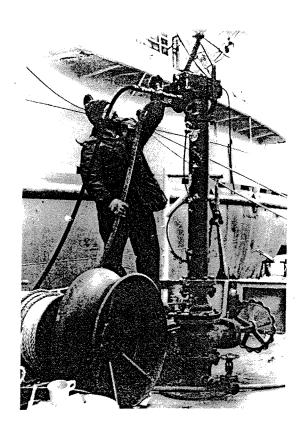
RCN Diver Adjusting Valve on Hose of Air-Driven Hot Tap Machine.
